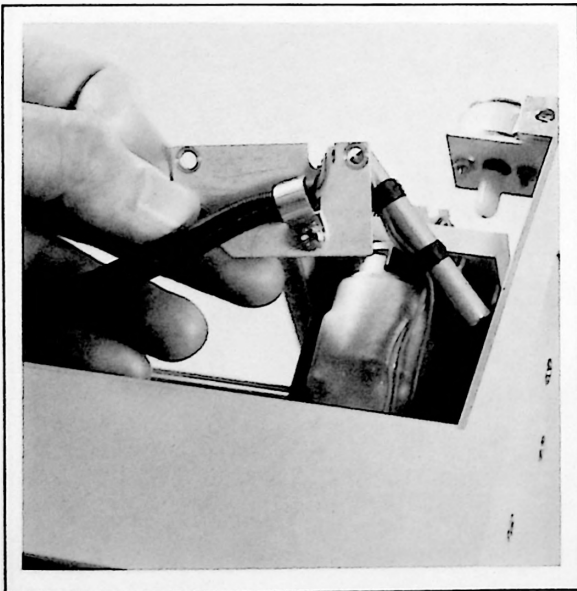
Y-Axis Servo Motor Replacement – Bottom Plate and Trailing Cable
